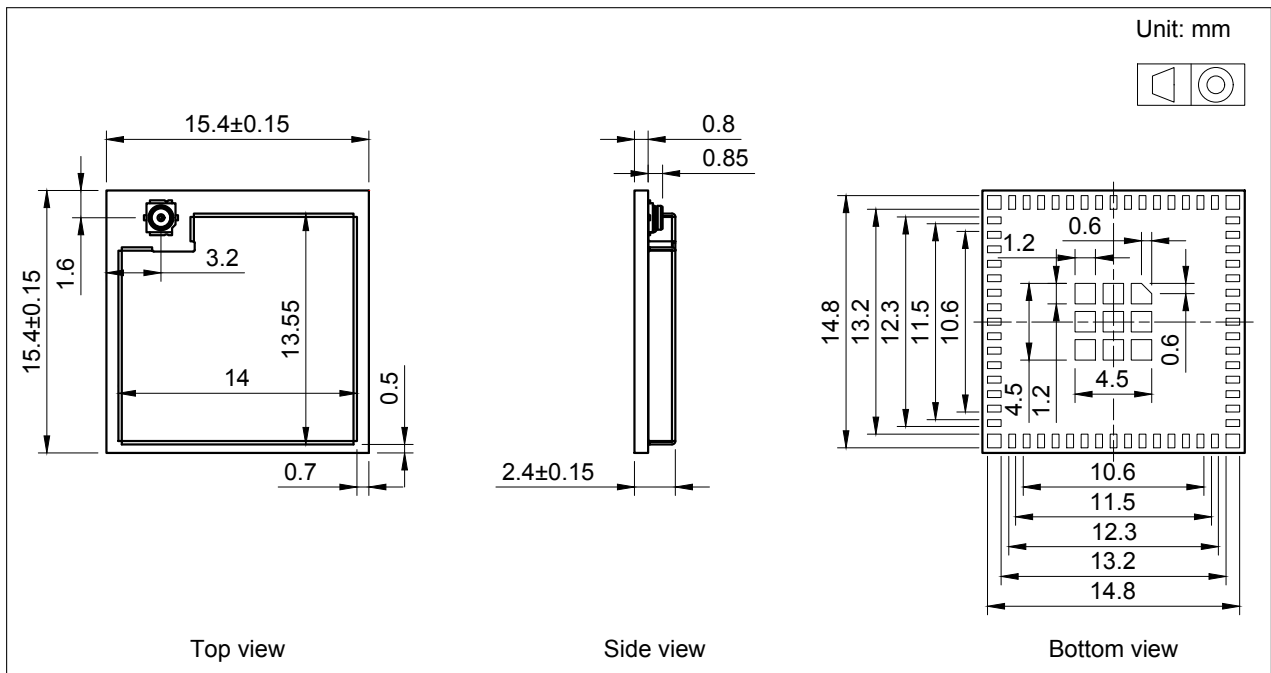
ESP32-S3-MINI-1U Physical Dimensions
